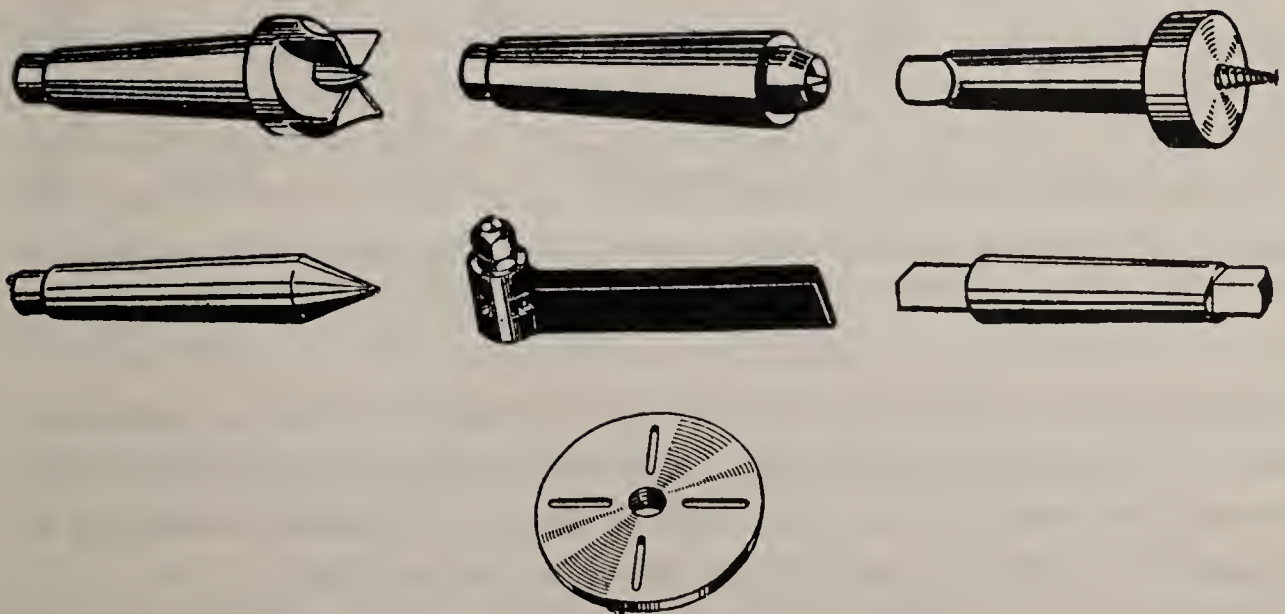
Typical lathe accessories. Shown are the drive center, cup center, screw center, core center, toolholder, adapter, and faceplate.
